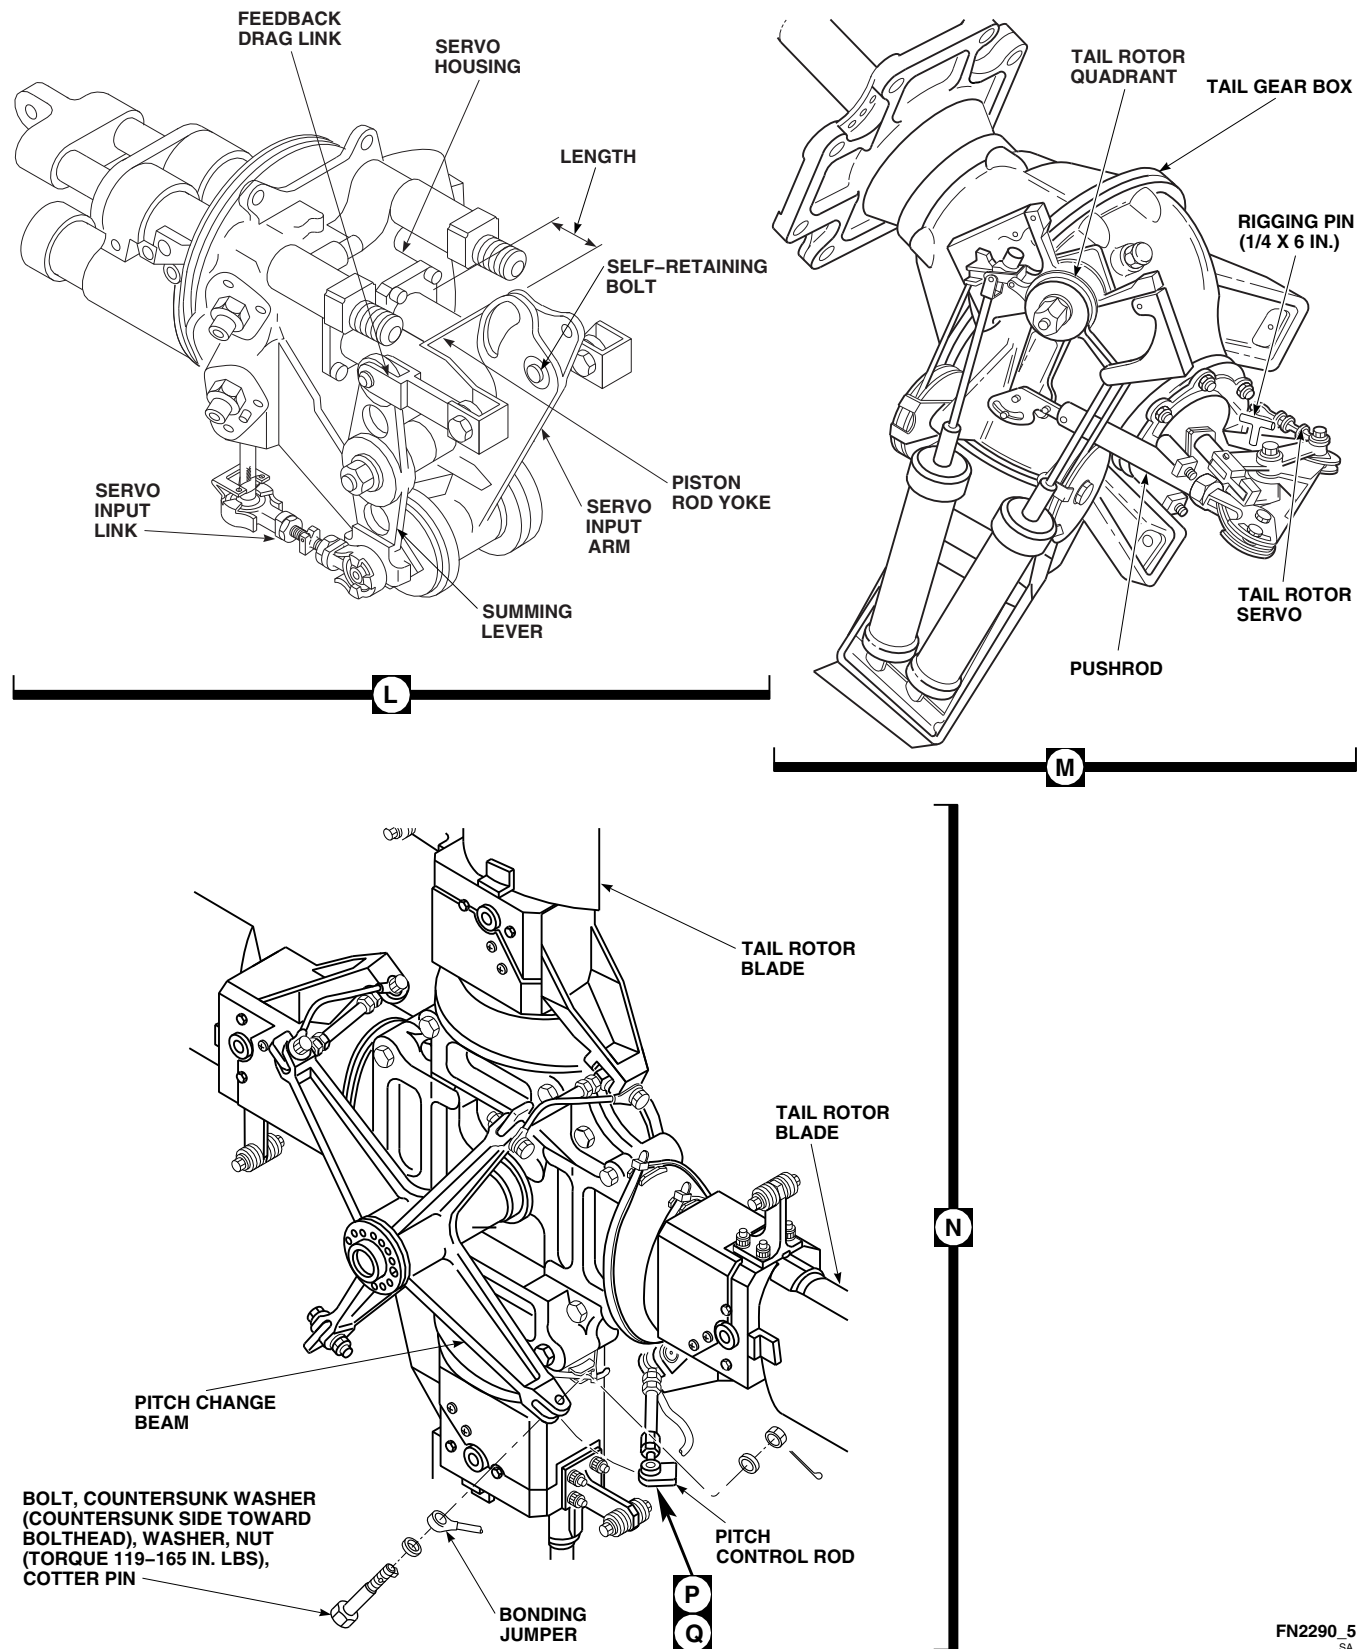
TAIL ROTOR SYSTEM COMPLETE RIG (SHEET 3 OF 7)
